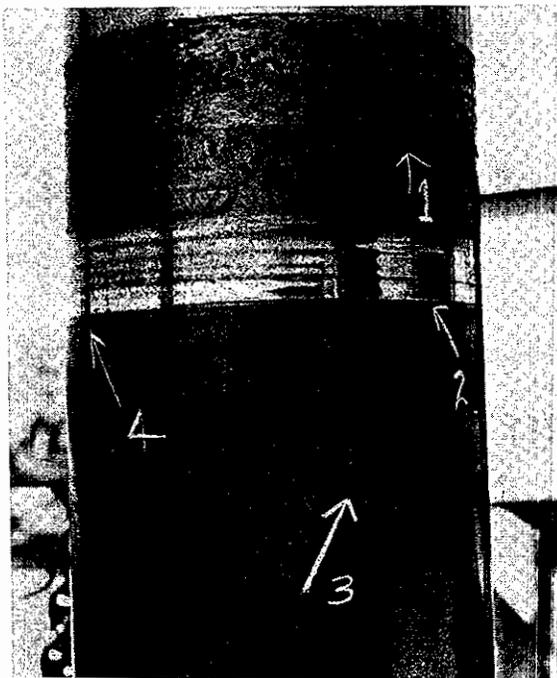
Girishk Powerplant Unit 1. Turbine shaft--Area 1 is upper packing gland surface. Area between 1 and 2 is upper packing surface. Note pitting in bearing Area 3. Note eccentric wearing at points 2 and 4. This is likely caused by shifting of the shaft center as wear occurs on the shaft and bearing.
